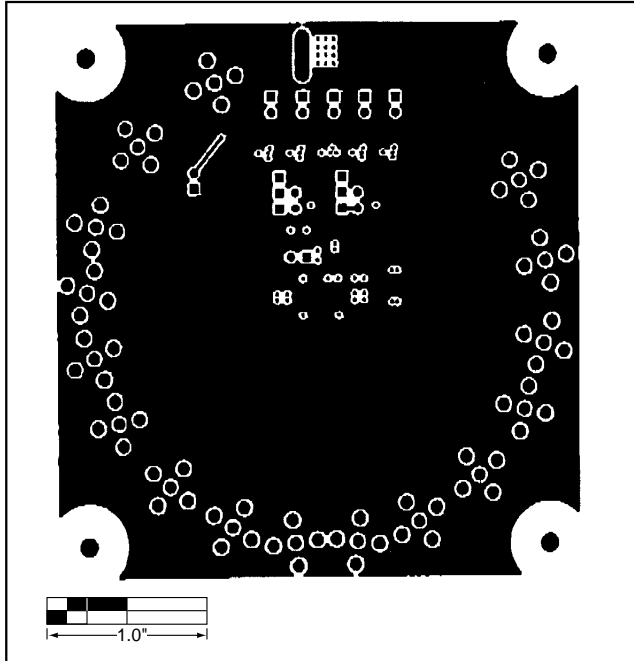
MAX3693 EV Kit PC Board Layout—Solder Side
